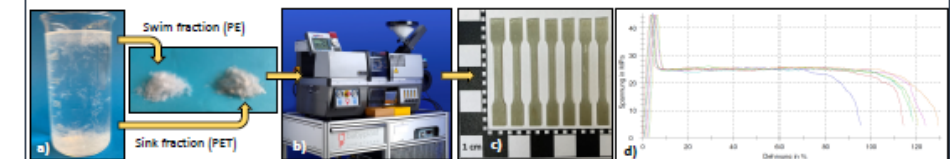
a) swim-sink separation b) byproduct injection moulding machine c) universal test specimen d) tensile test results of PET specimen
